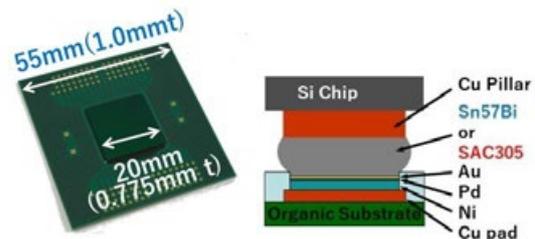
Appearance of test sample and cross-sectional image of solder joints
